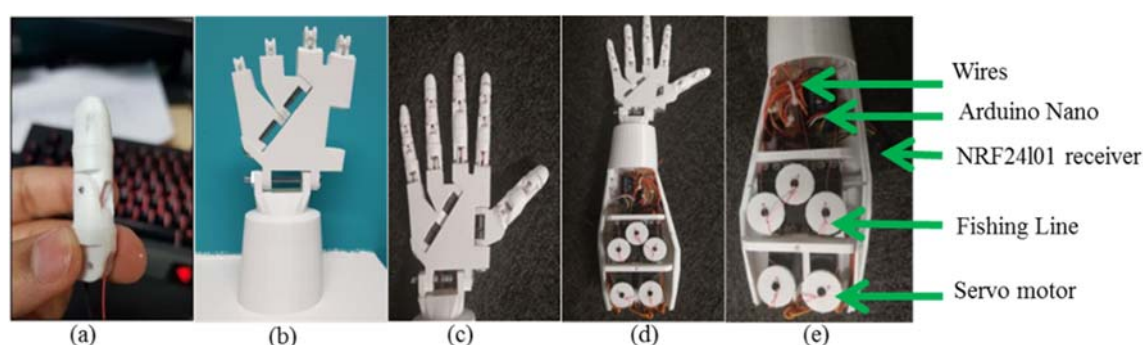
(a) Part of one assembling finger (b) Assembling palm and wrist (c) Assembling 3D printed hand (d) Assembling 3D printed forearm (e) Assembled circuit in the printed forearm
